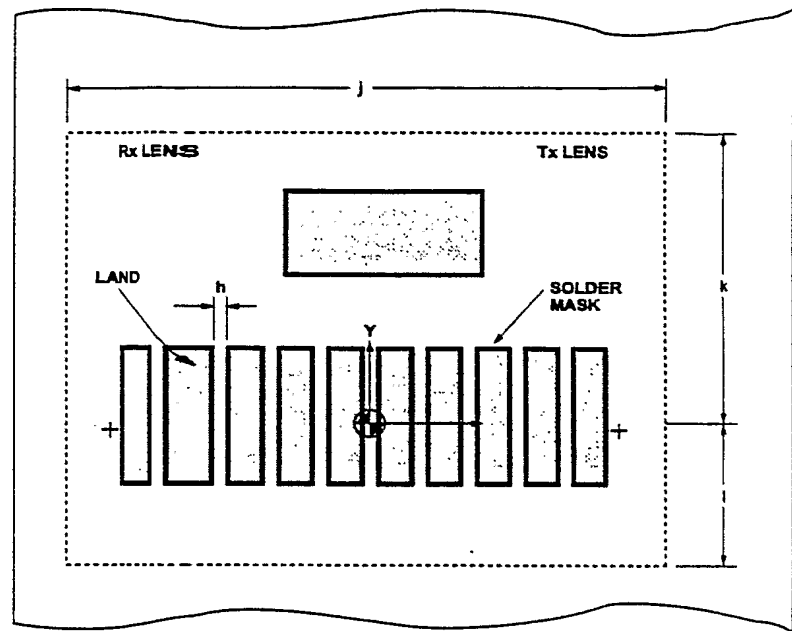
HSDL-3610#008/#018 PCBA – Adjacent Land Keep-out and Solder Mask.
